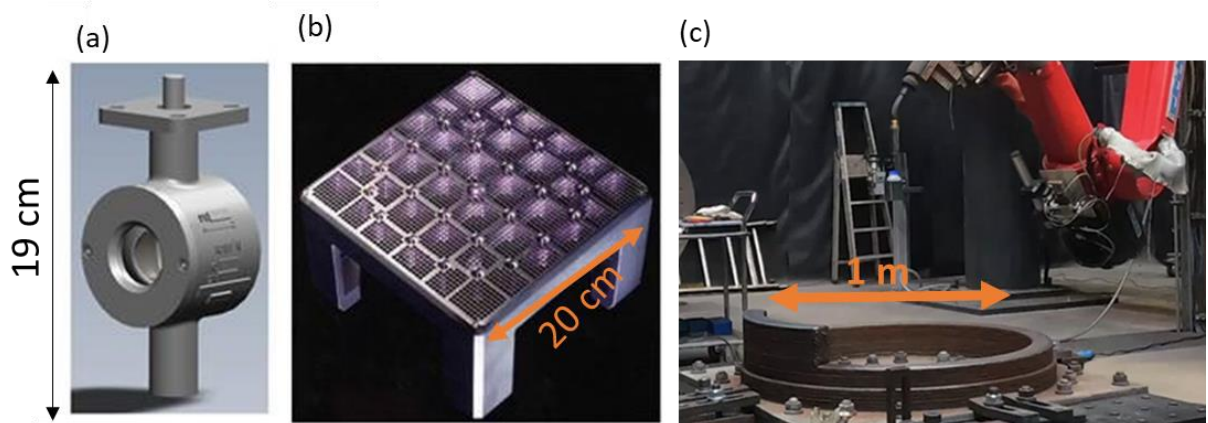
(a) A valve body studied in the NUCOBAM project which should be fabricated by Ramen Valves. (b) A debris filter studied in the NUCOBAM project which should be fabricated by Framatome. These two components are made of 316L and are/would be built by laser powder bed fusion (LPBF). (c) The sealing ring bought by EDF Hydro produced by WAAM [4].
